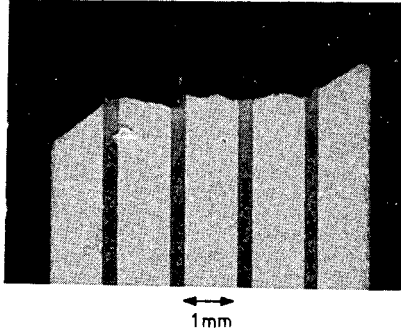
Cross section of fracture surface of laminated specimen. Outer sheets in shear mode, inner sheets in tensile mode (Ref. 1)
